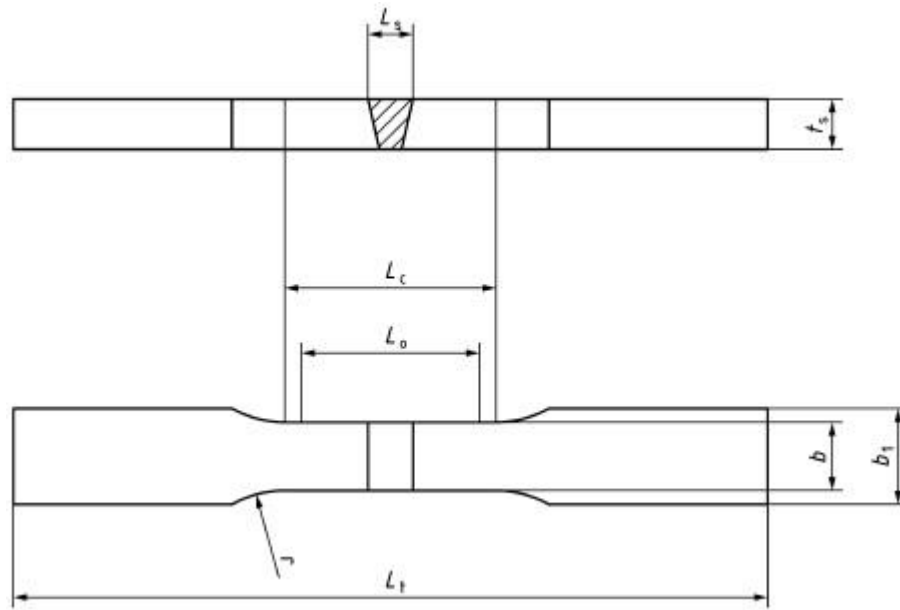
Geometry of tensile test pieces for welded plates (SFS-EN ISO 4136, p. 15).
